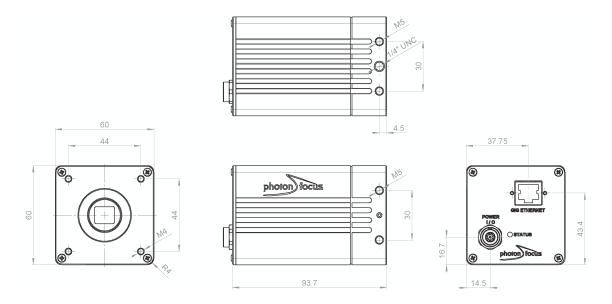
Mechanical dimensions of the GigE camera, displayed without C-Mount adapter
